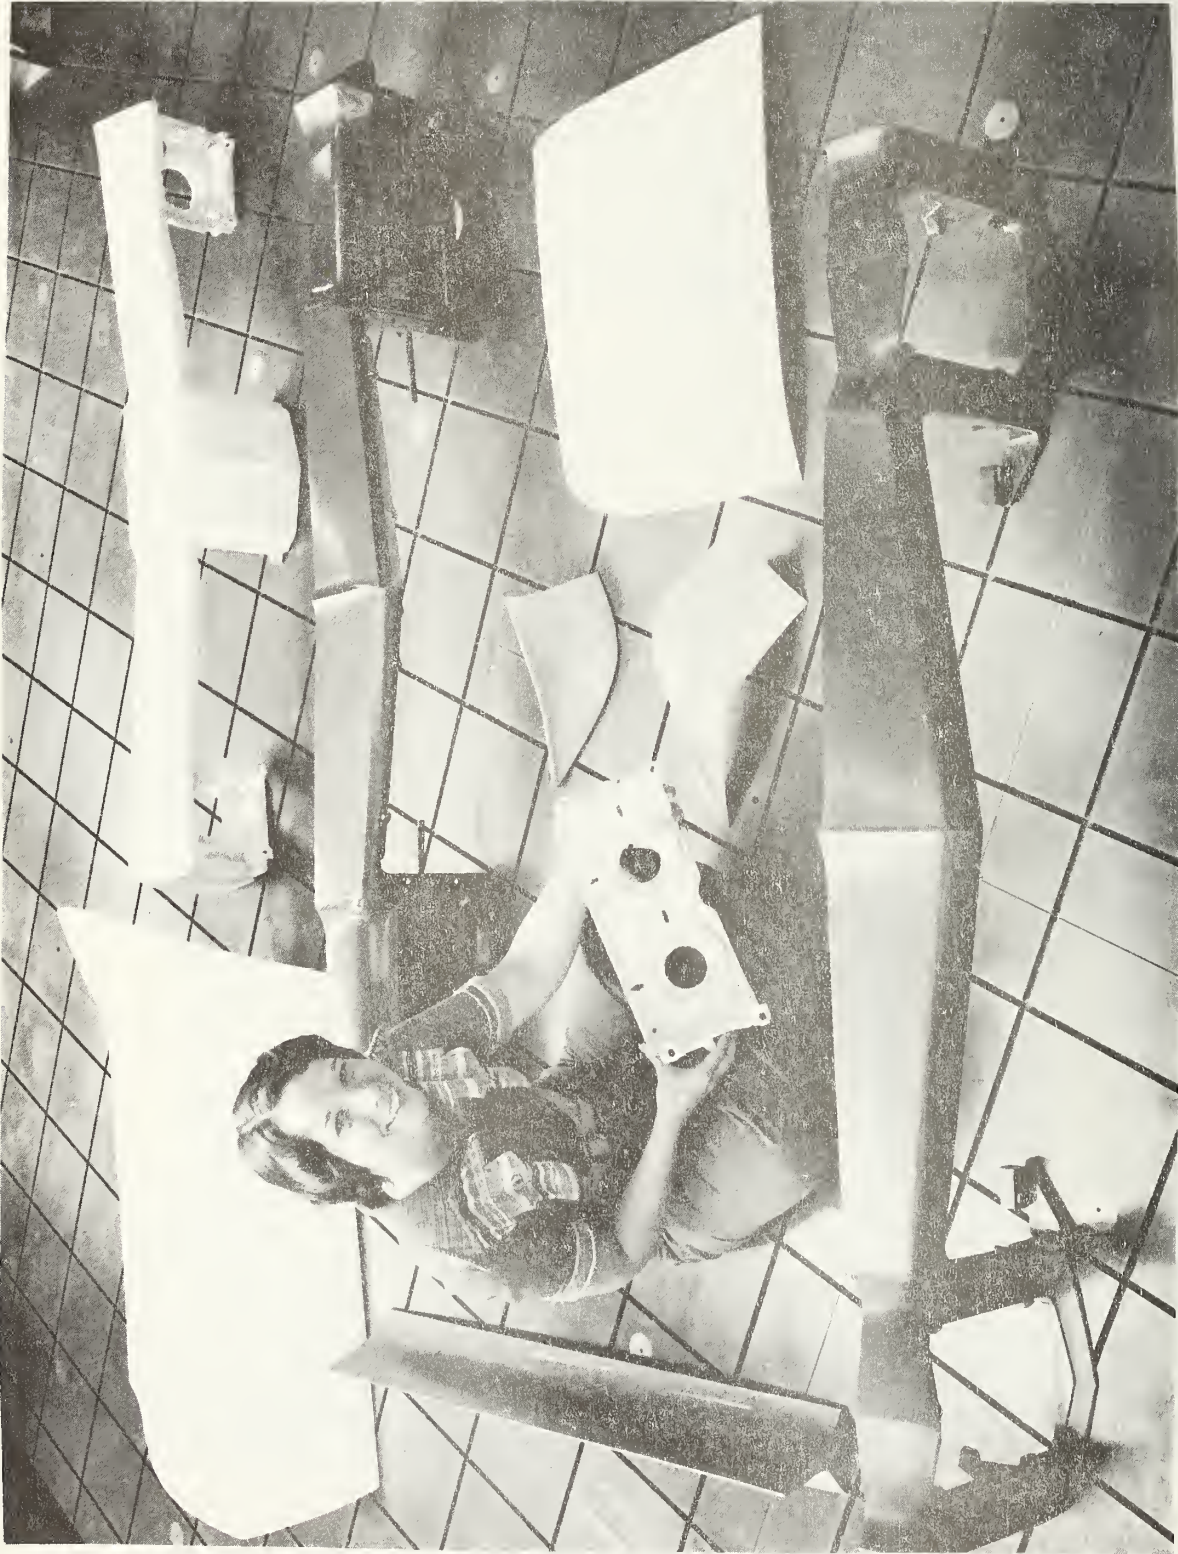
COMPRESSION MOLDED AUTO PARTS
